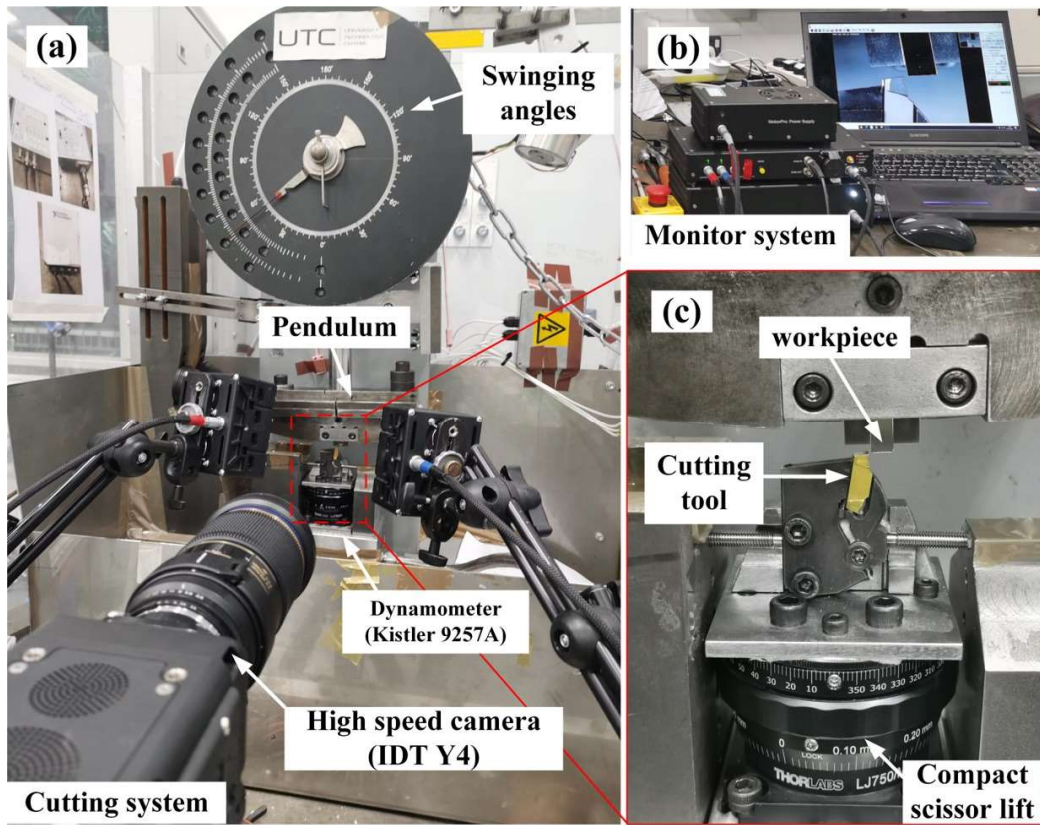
Setup of the pendulum-based cutting test. (a) Pendulum-based cutting machine; (b) Laptop monitor; (c) Positions of cutting tool and workpiece (The cutting thickness is controlled by a compact scissor lift).
